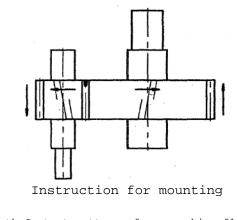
Record of no-load pattern Opposite: Instruction on assembly drawing.
